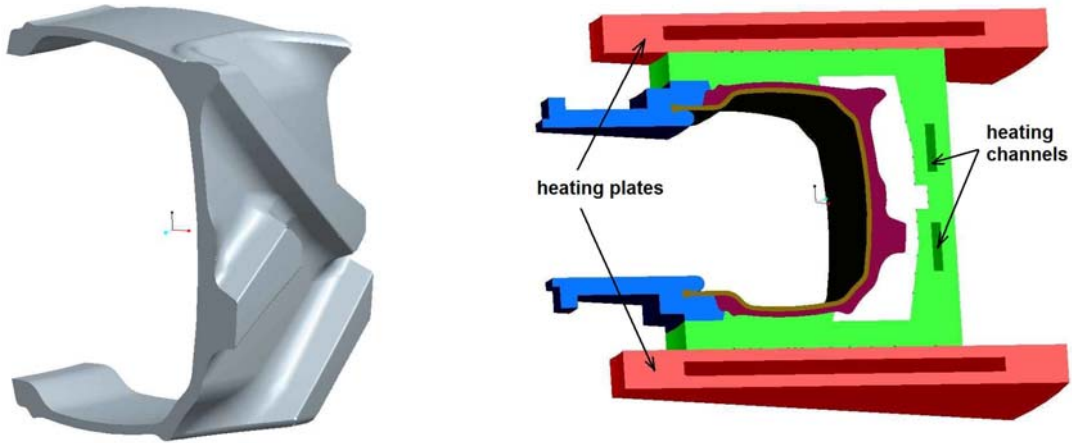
CAD model – tyre segment (left), mold segment (right).
